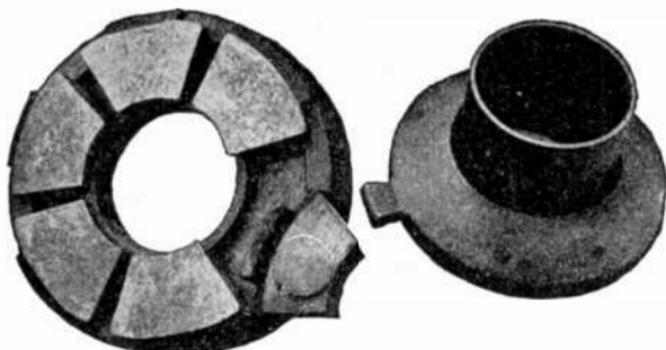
,241.—Westinghouse vertical water wheel alternator upper guide bearing and thrust bearing pot, Kingsbury thrust bearing in place.
